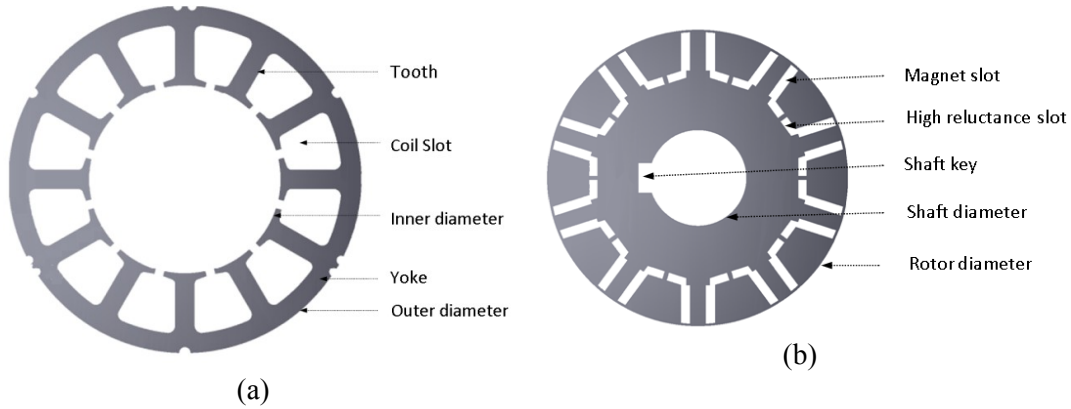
Schematic of designed motor (a) Stator and (b) Rotor
